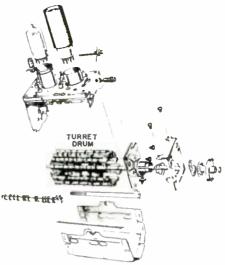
Exploded view of the newer and smaller turret tuner adapted by Admiral.
